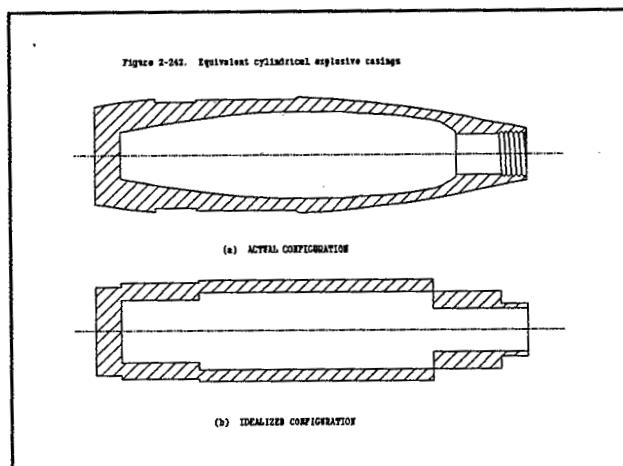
Equivalent cylindrical explosive casings (Fig. 2-242, Ref. 1)
